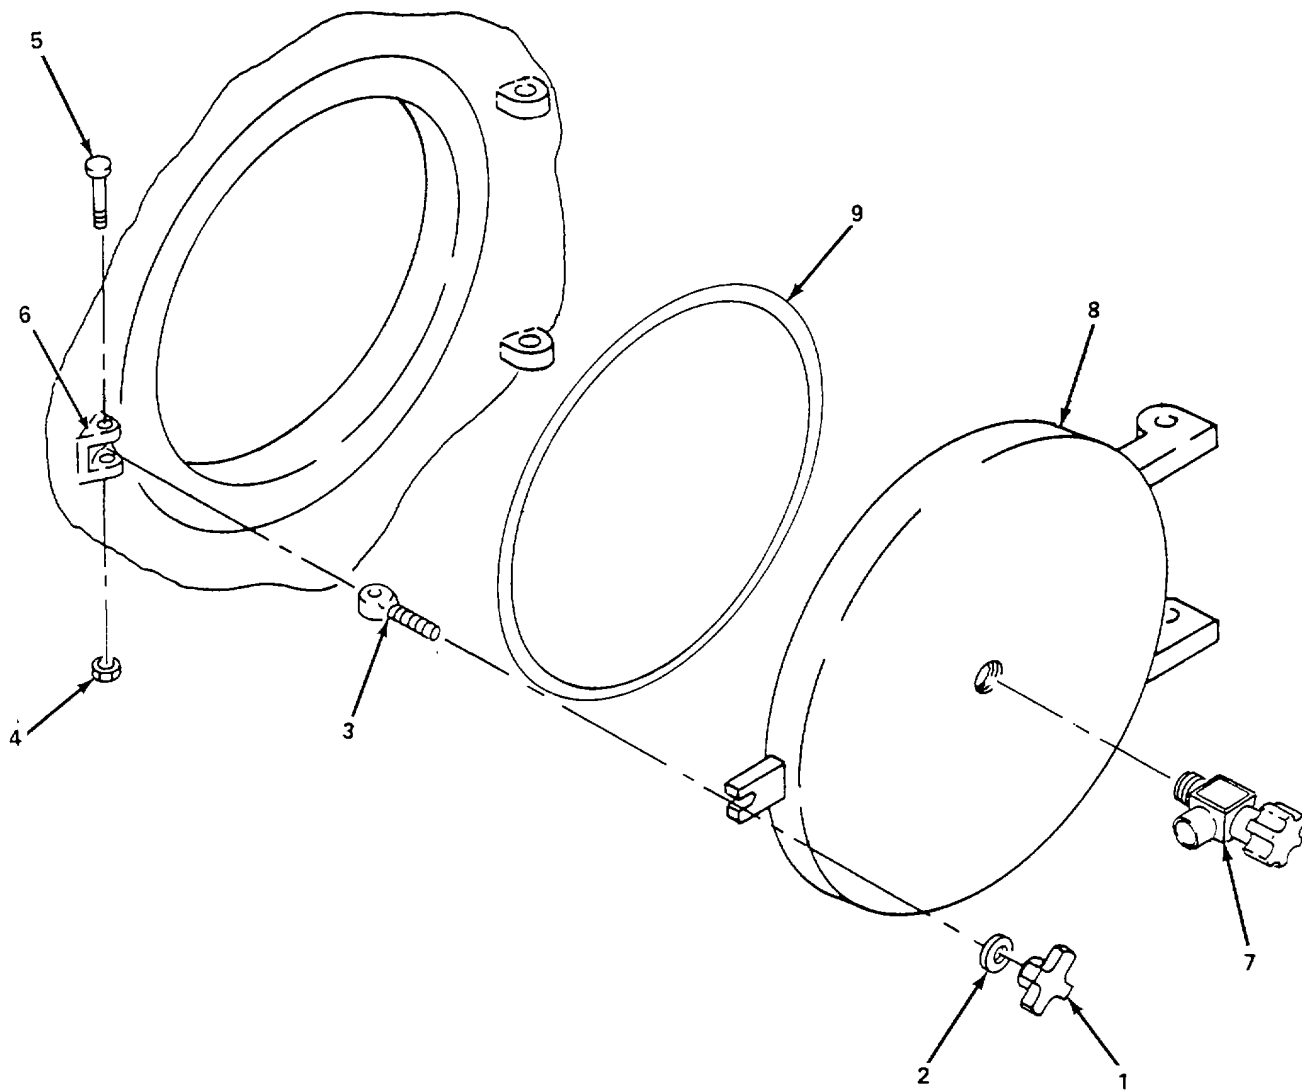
Medical Lock (M/L) Inner Door Assembly, Repair.
